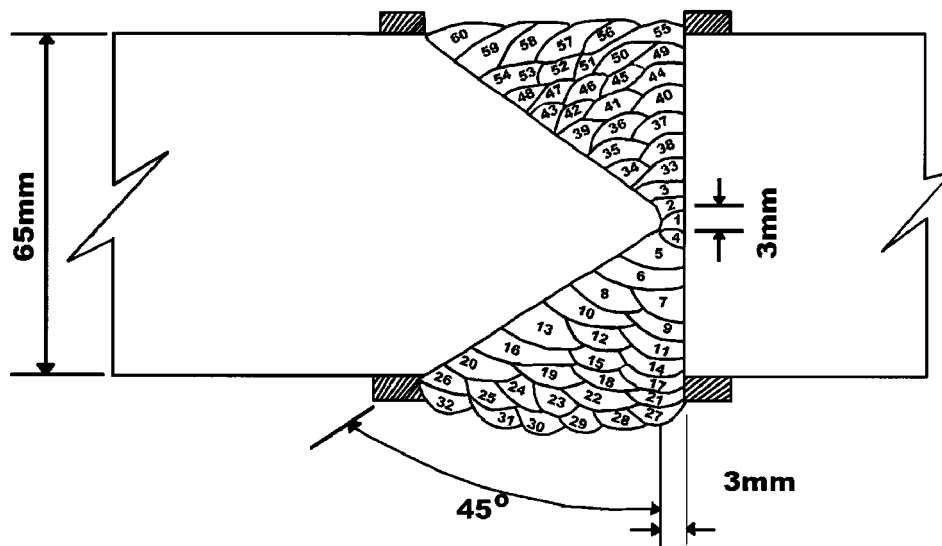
Geometry of the welded joint and sequence of the welding passes
